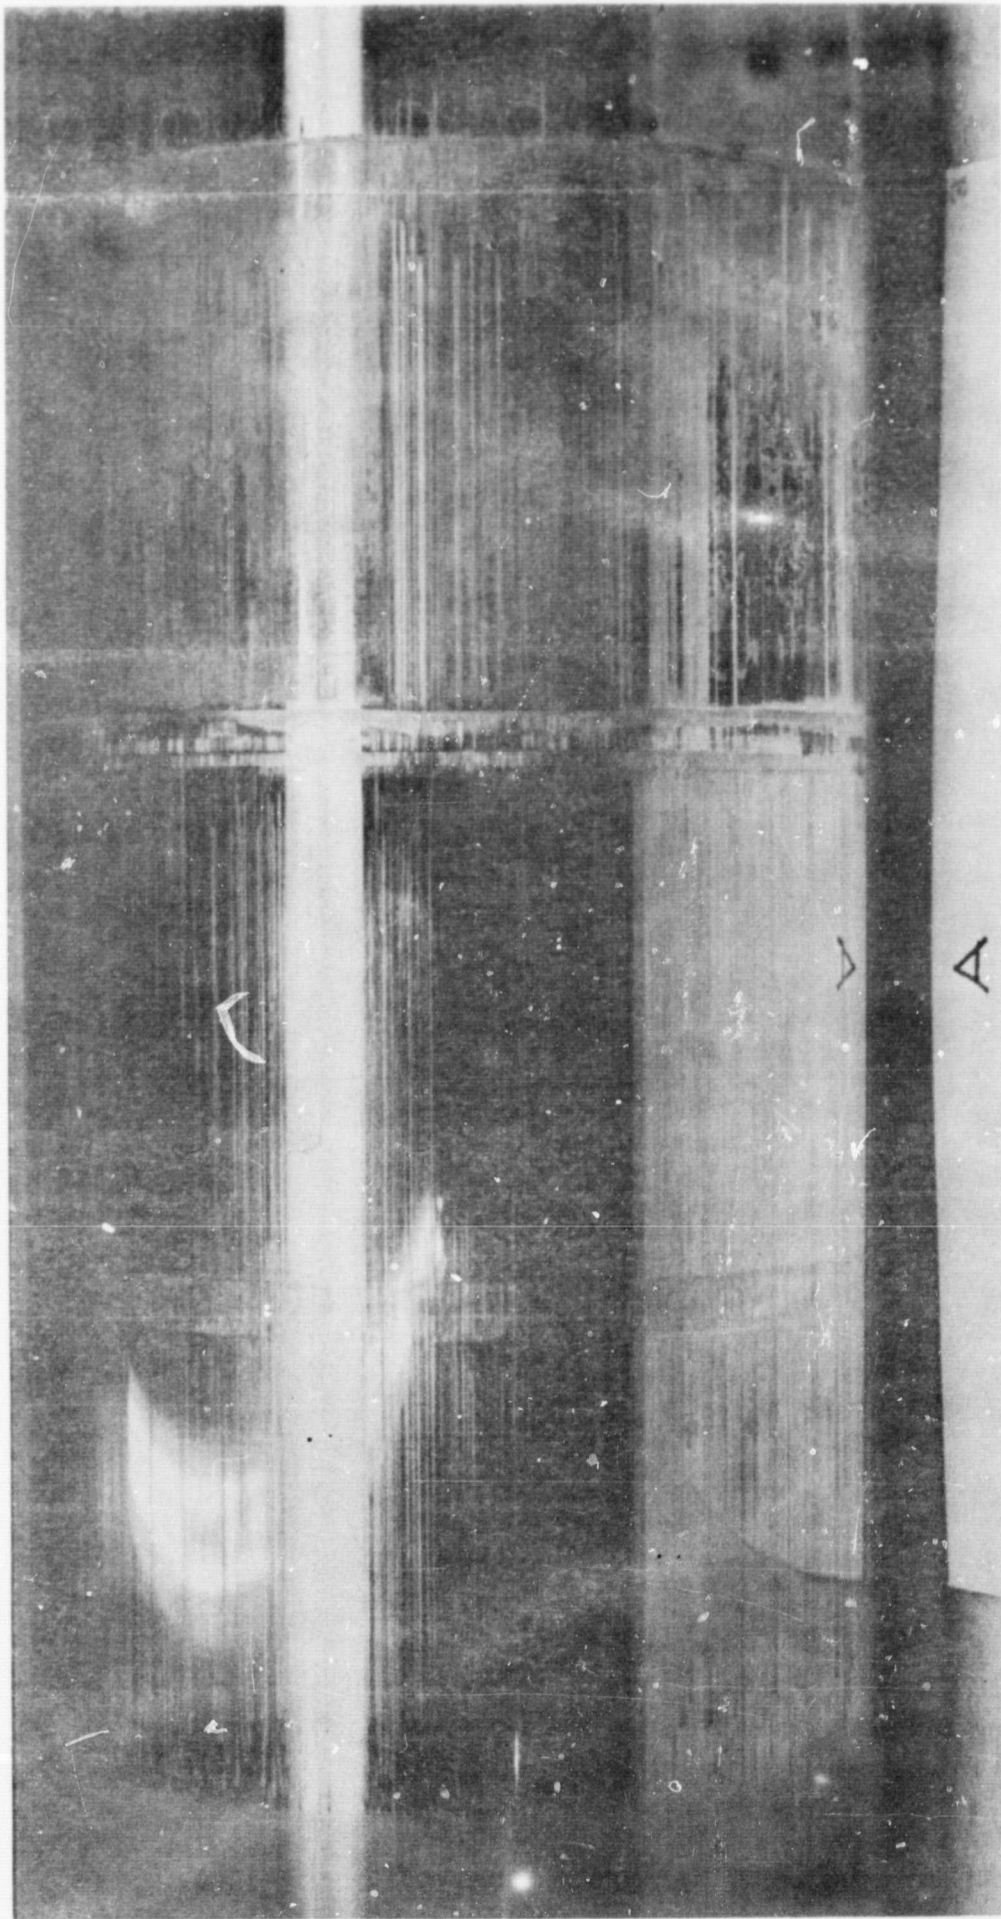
Piston Rod, A-End, Three-Inch Polyimide V-Seal
